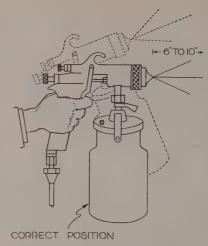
Spray gun should be held perpendicularly to the surface as shown by solid lines here
